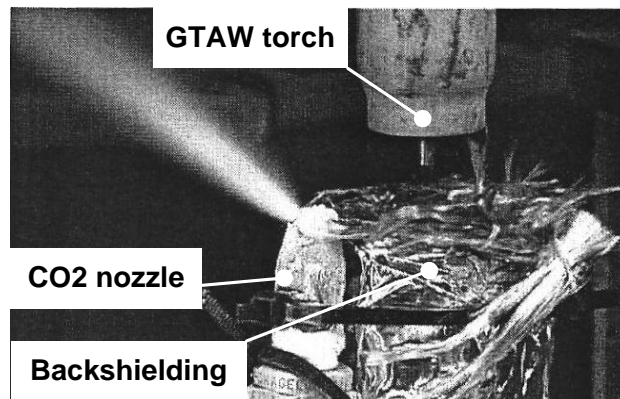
Cooling nozzle and back shielding device for bottom side cooling by Bertaso et al. [44]
